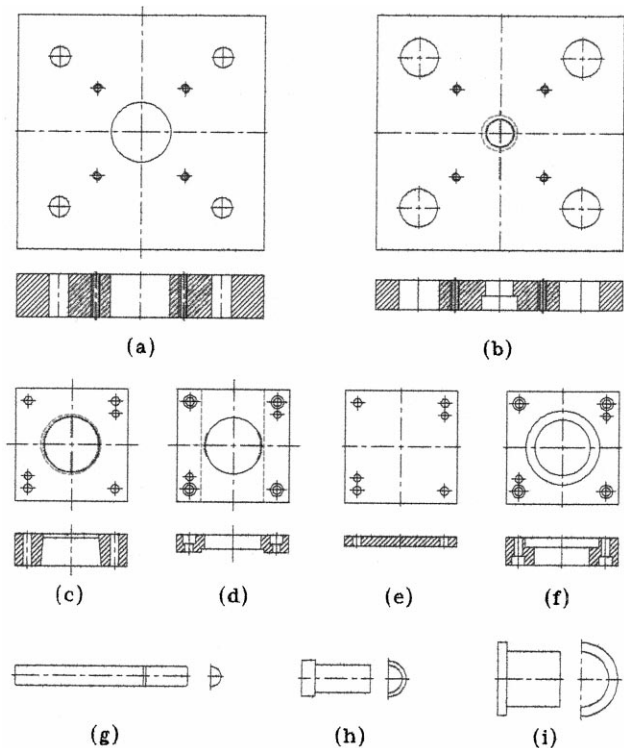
Parts drawings for the blanking die: (a) lower holder; (b) upper holder; (c) die; (d) stripper; (e) backing plate; (f) punch holder; (g) guide post; (h) shank; (i) punch.
